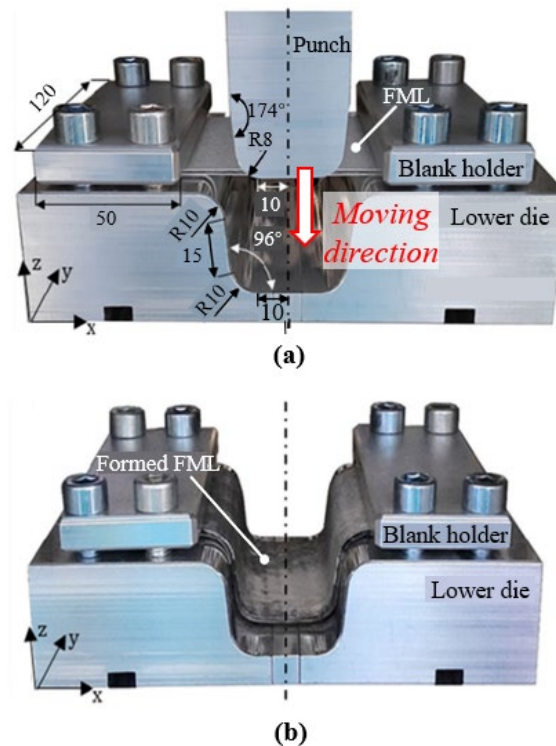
Thermoforming set-up for hat-shaped parts: before (a) and after (b) forming.
